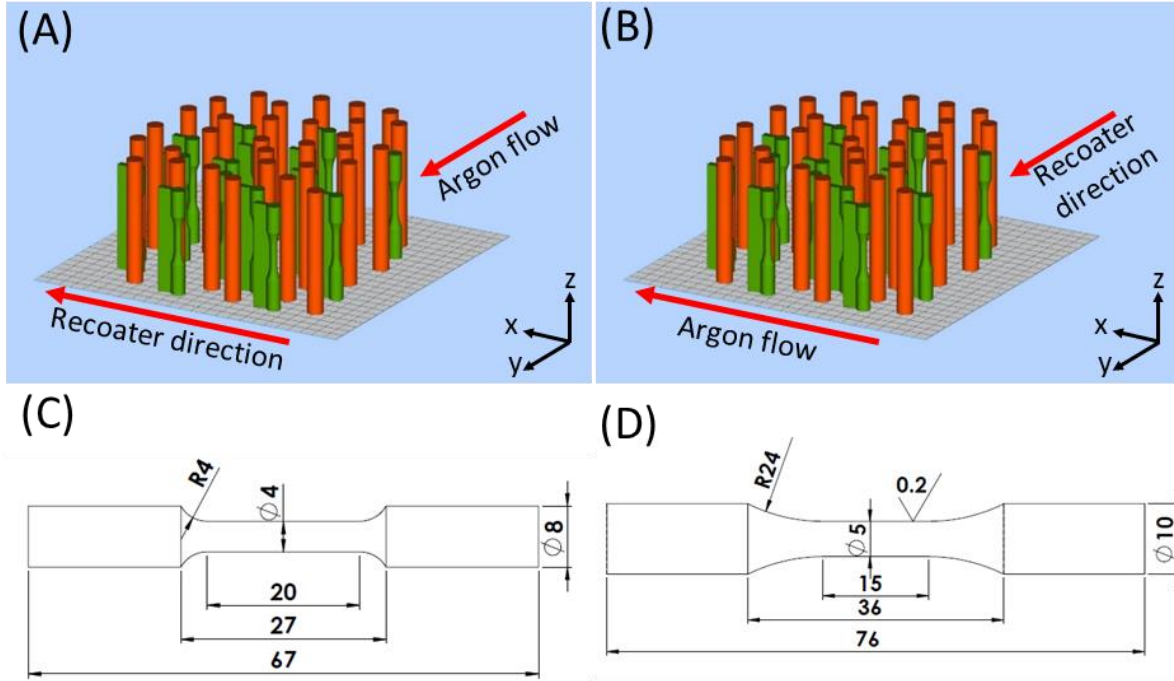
Schematics showing the build layouts for (A) EOS M290, (B) Renishaw AM250, (C) geometry of the net shape tensile specimens, and (D) the final geometry of the fatigue specimens after machining (all dimensions in mm). Note that the cylindrical bars which were later machined into fatigue specimens are shown in red and the net-shape tensile specimens are shown in green in (A) and (B).
